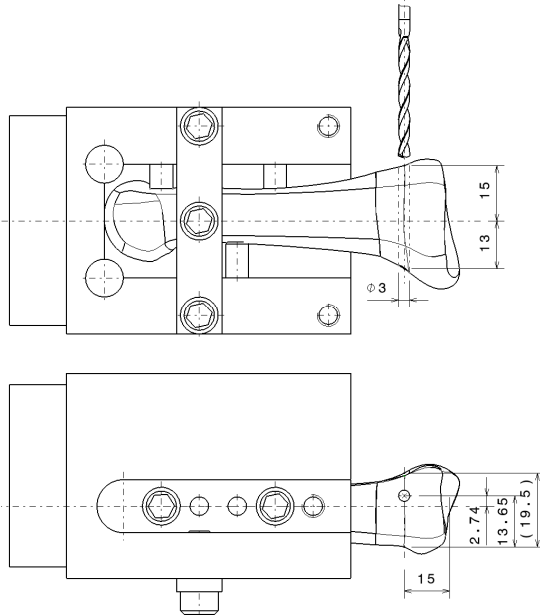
Drilling a $\text{\O}3\text{mm}$ hole on the specimen.
